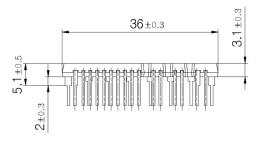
Package outline dimensions (Fullpack) (Unit: [mm])
